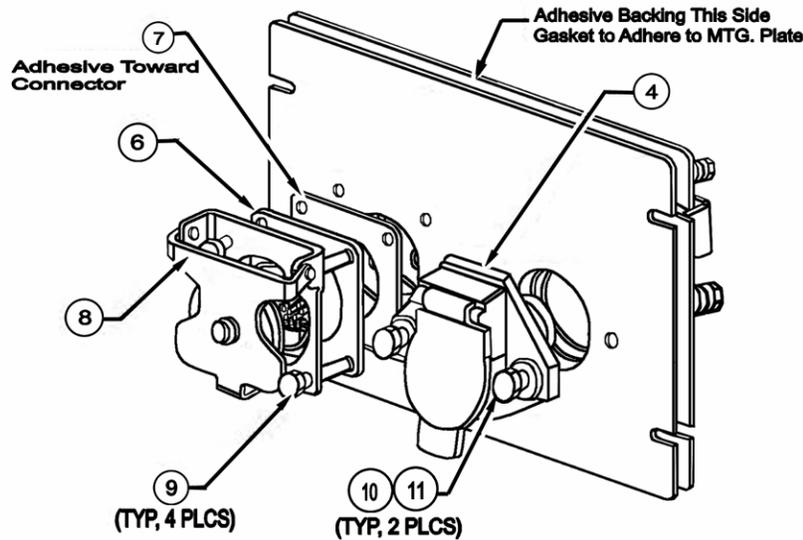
0N10-1037-00 Module Face Plate Sub-Assembly, Back Side
